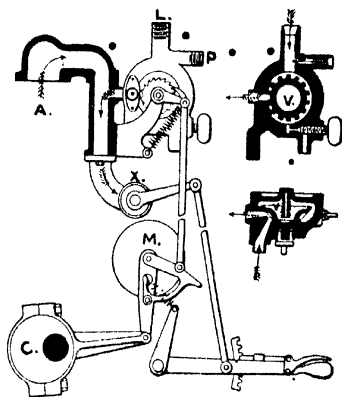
Cup wheel gravity feed carburettor with trip action combined ratchet and throttle control—Gobron Brille.
